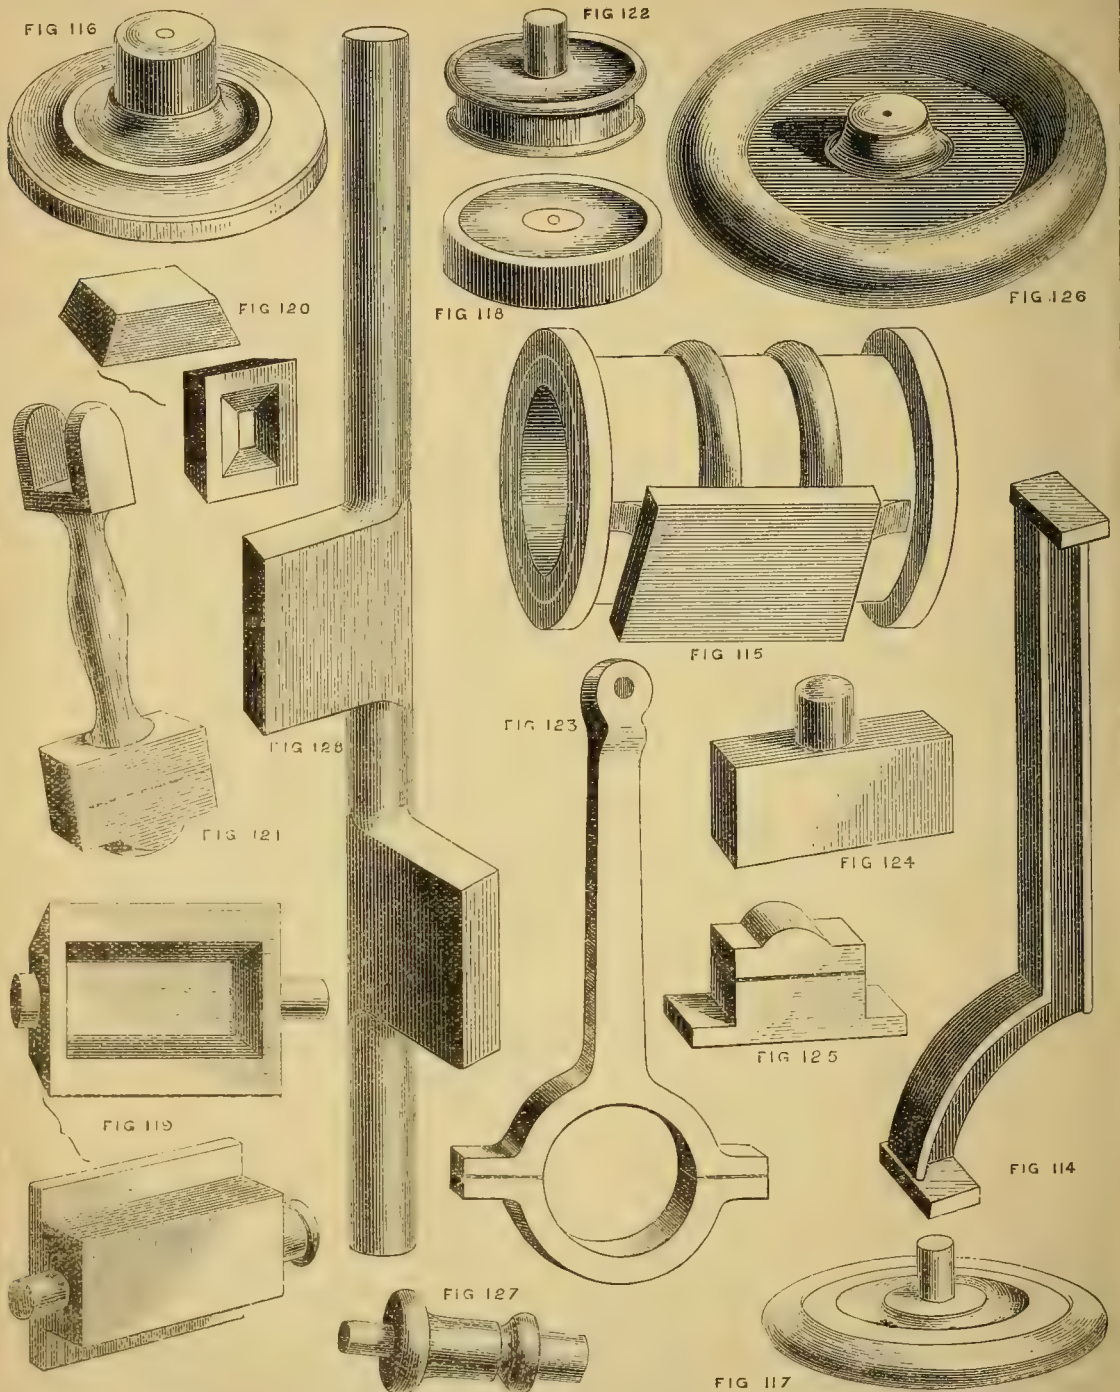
STANDARD. FIG. 115.—CYLINDER. FIG. 116.—CYLINDER TOP. FIG. 117.—CYLINDER BOTTOM. FIG. 118.—PISTON. FIG. 119.—STEAM-CHEST. FIG. 120.—SLIDE-VALVE. FIG. 121.—CONNECTING-ROD. FIG. 122.—ECCENTRIC. FIG. 123.—ECCENTRIC BAND AND ROD. FIG. 124.—CROSS-HEAD. FIG. 125.—BEARING. FIG. 126.—BALANCE WHEEL. FIG. 127.—STUFFING BOXES. FIG. 128.—CRANK FORGING.
